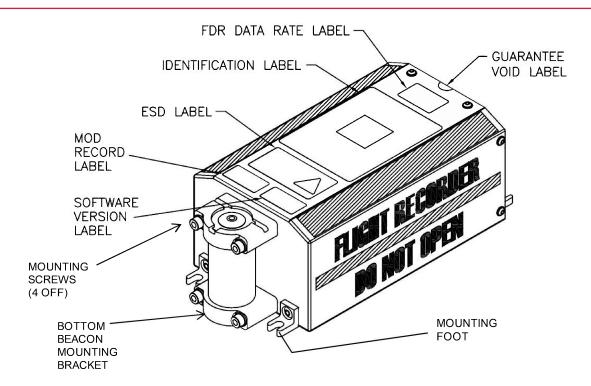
Existing 30-Day Beacon Mounting and Label layout
